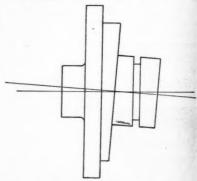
Drawing showing method of setting up a cam for cutting the groove in a lathe.
